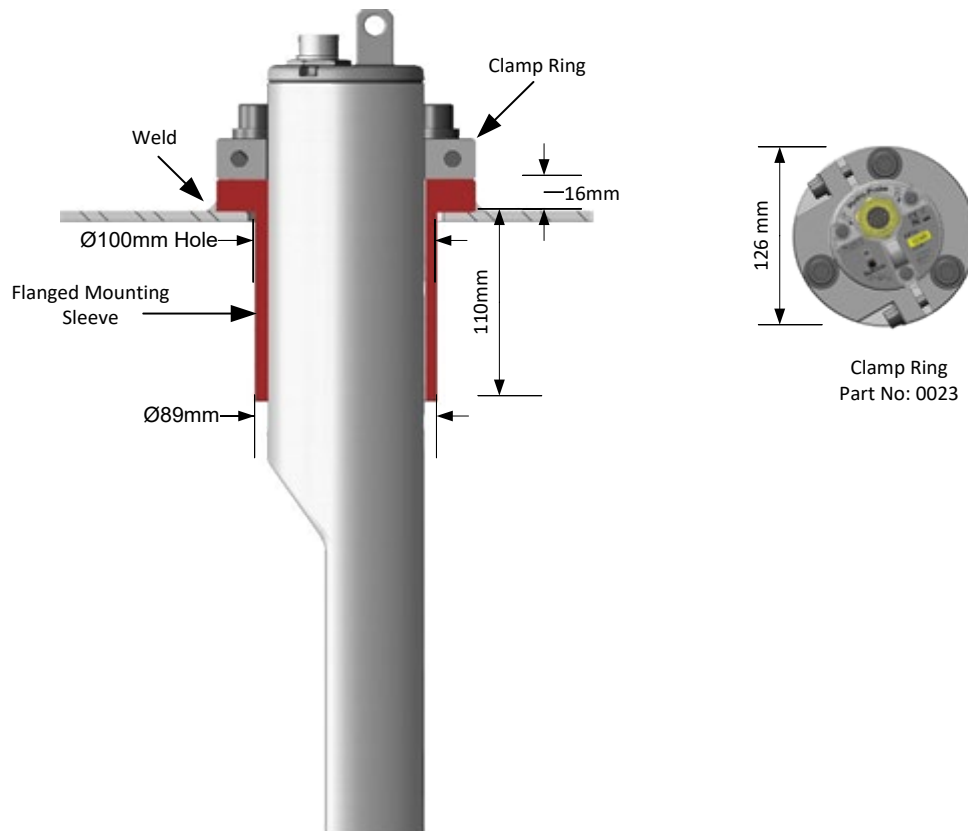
Flanged Mounting Sleeve (Part number 0024A)
